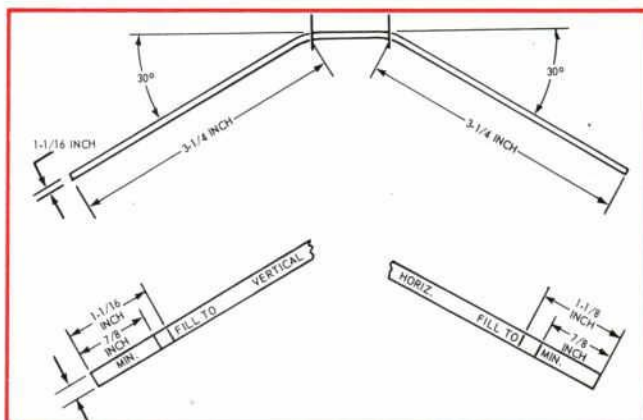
Details for Making the Dipstick for Tecumseh Compressors
